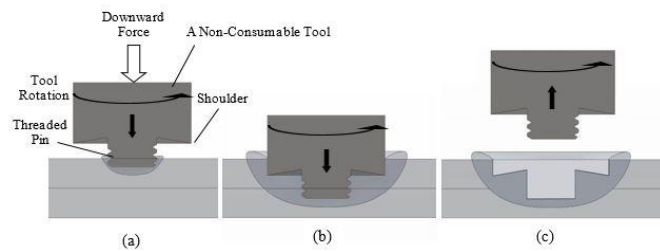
A schematic illustration of FSSW process (a) plunging; (b) stirring (dwell); (c) drawing out [6].
